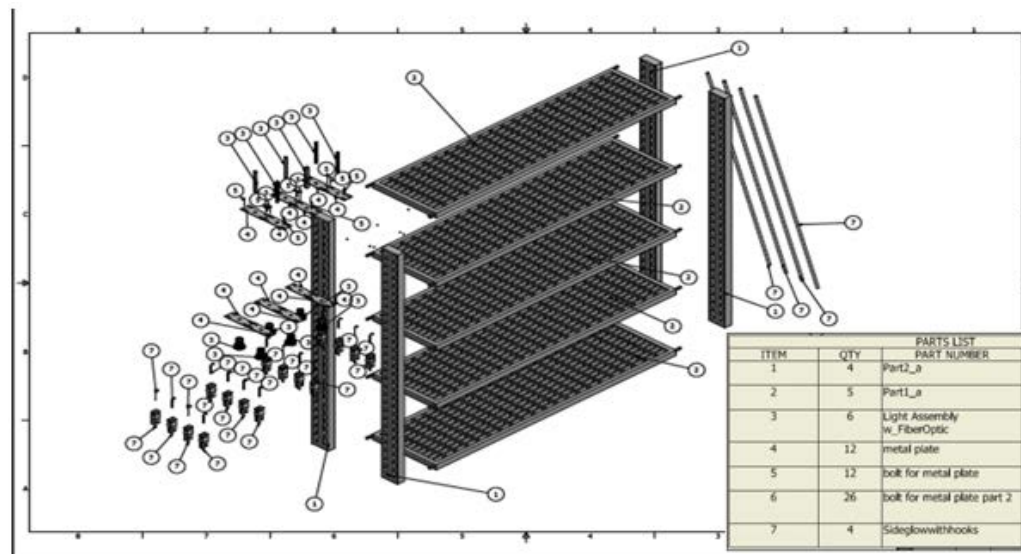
Parts draft list. Parts draft and list generated by Inventor Autodesk.
